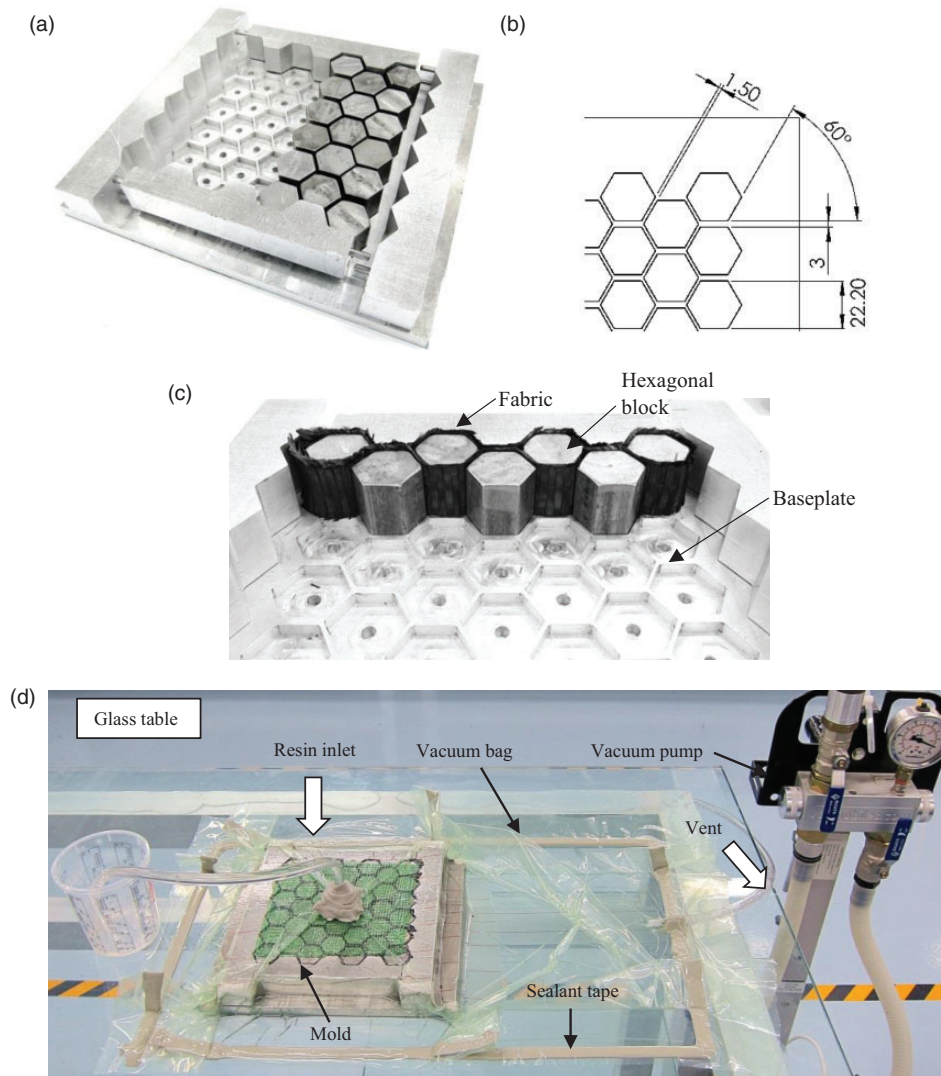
(a) Mould, (b) base plate spacings, (c) carbon fibre fabric with a height of 22 mm were inserted into the openings in the mould and (d) infusion setup.
